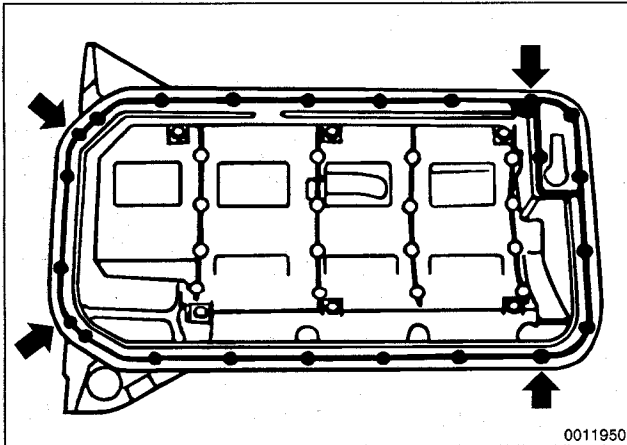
Joint-mating areas at oil pan gasket where sealer should be applied (arrows). Apply a bead 3 mm wide by 2 mm high.
